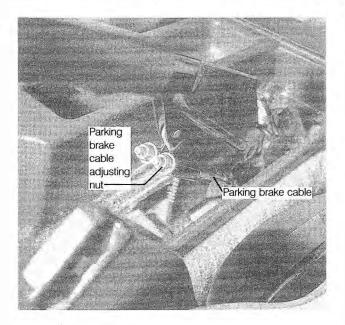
Parking brake lever assembly showing cable connections and adjustment points.
